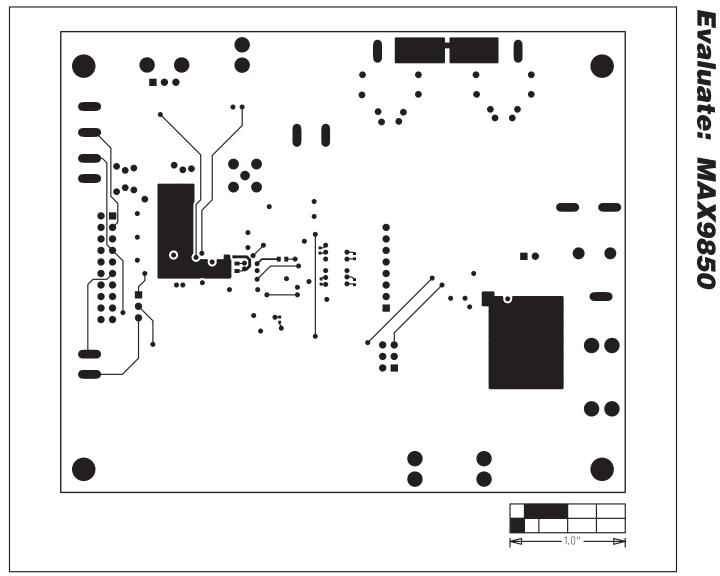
MAX9850 EV Kit PCB Layout—Solder Side
